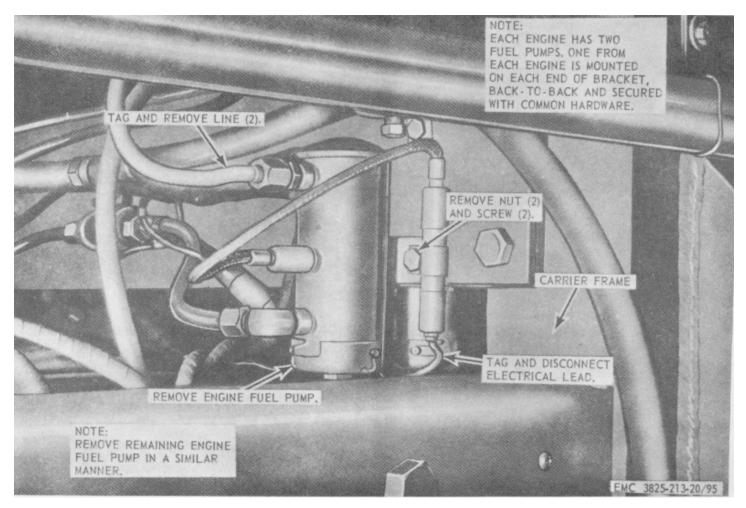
Plow and carrier engine fuel pump assembly, removal and installation.
